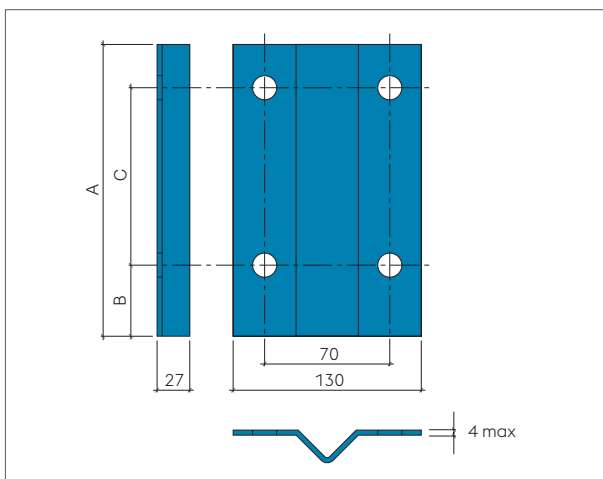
WOC cleats designed for welding to the primary structure / sections 142 - 262
